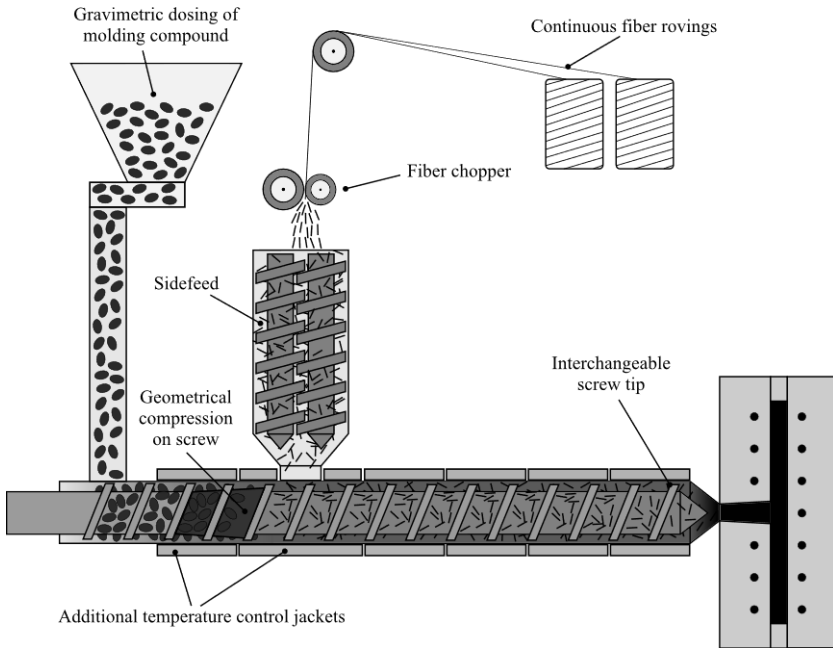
Long fiber injection molding process variant “LGF plasticizing unit with conveying screw tip and separate granulate feed port”
